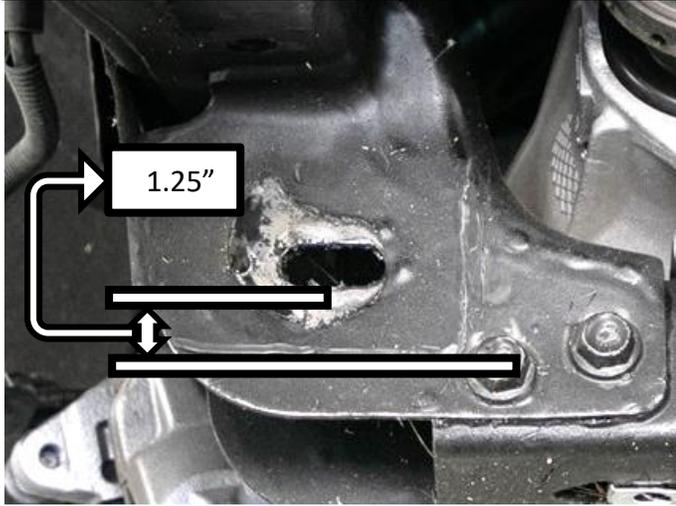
Trim Passenger Side Rear Crossmember Mount.
